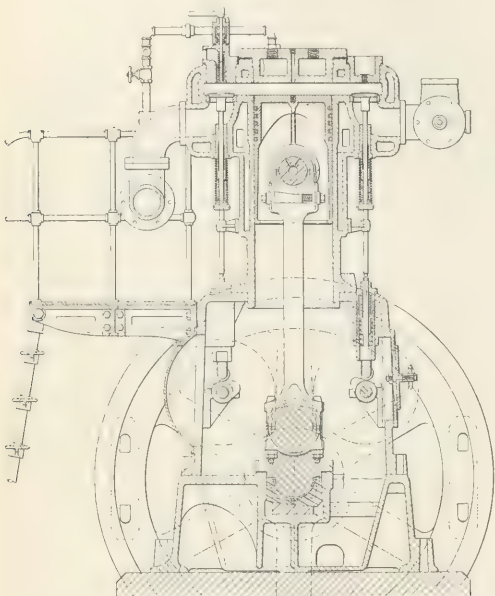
SECTIONAL VIEW OF ONE OF THE GAS ENGINES
